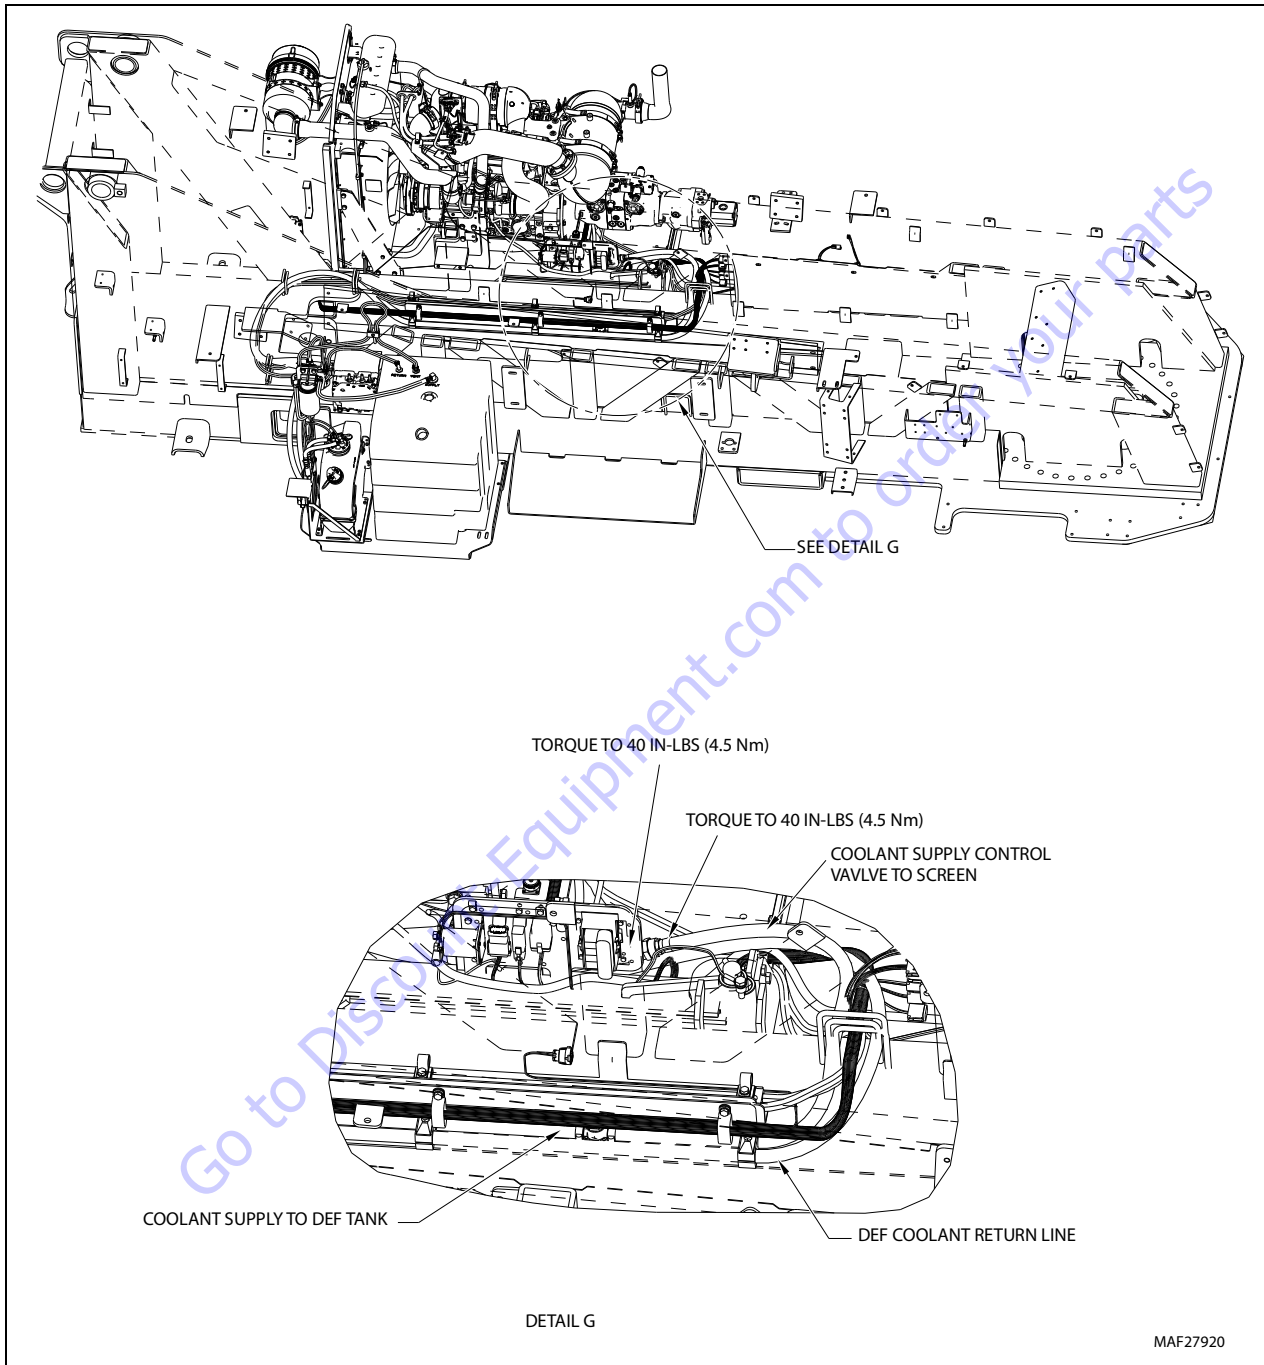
Engine Installation and Diesel Exhaust Fluid (DEF) System (T4F & Stage IV) - Sheet 5 of 6
